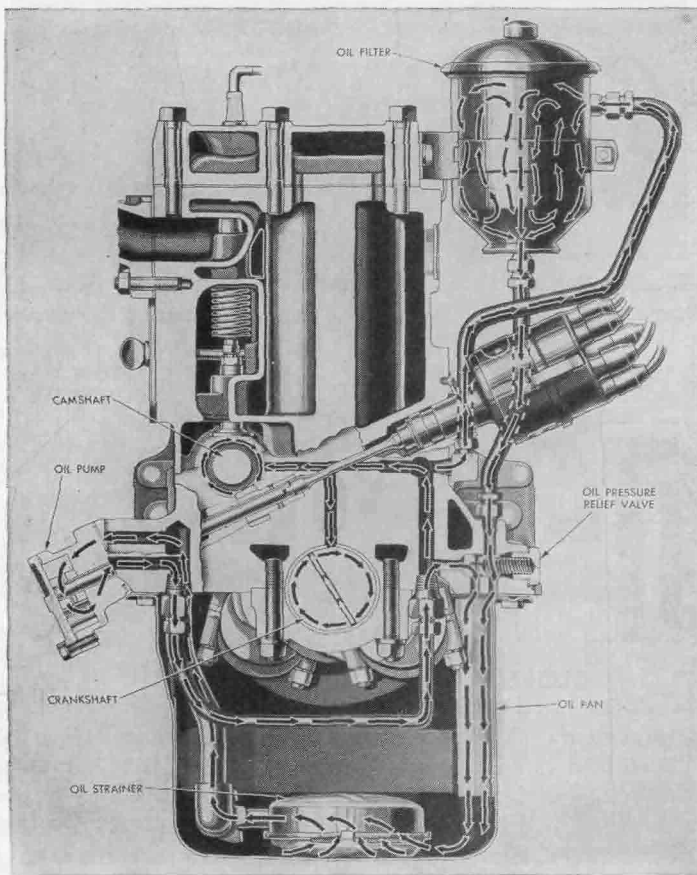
End sectional view of an L-head engine showing location of oil pump, oil filter, and oil-pressure relief valve. Direction of oil flow is shown by arrows. (Dodge Division of Chrysler Corporation)
